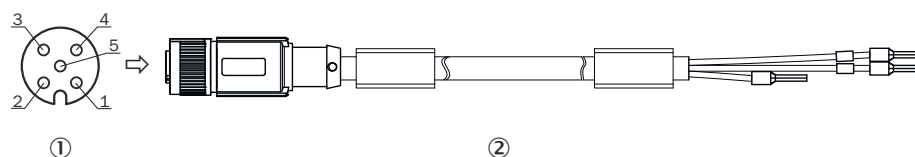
Adapter cable, e.g. part no. 2095608 (5 m)
